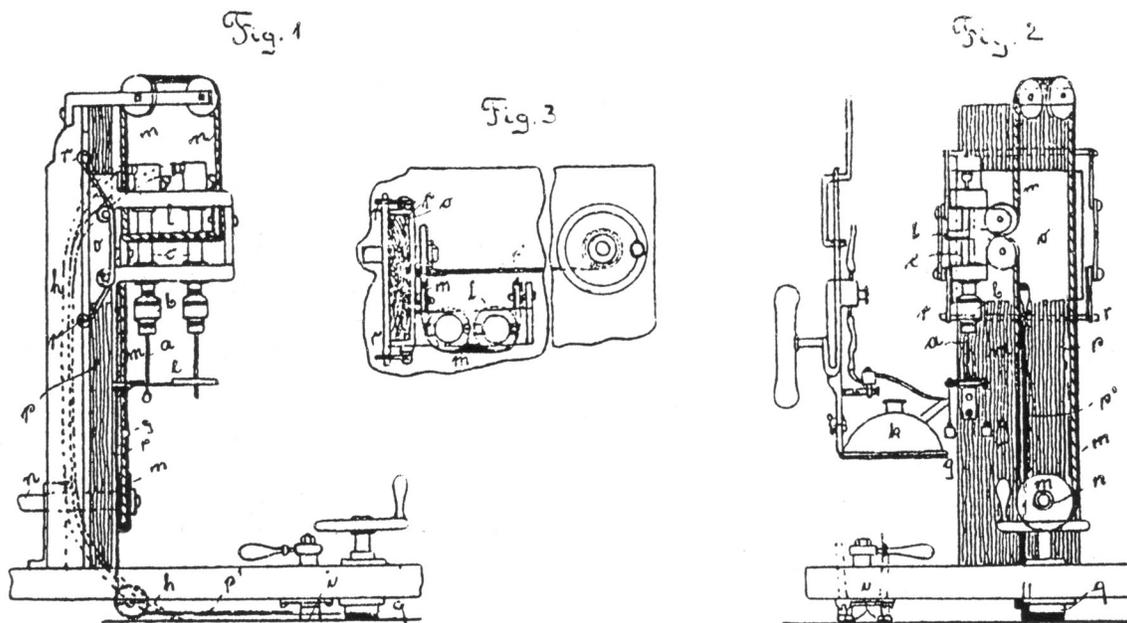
Machine for making hollow-glass beads (Jossand method) (Parkert 1925:156, Figure 36).
